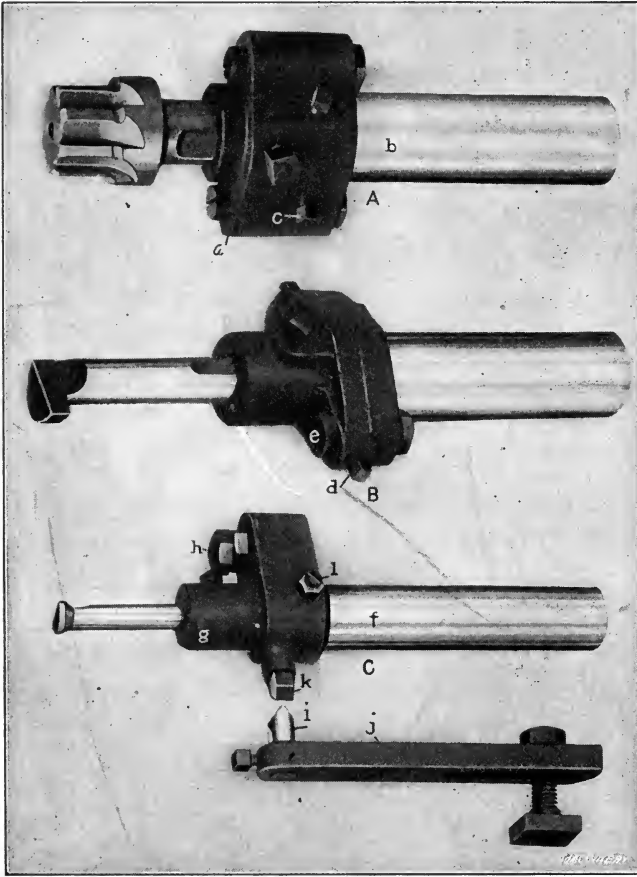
Adjustable Counterboring, Boring and Recessing Toolholders
